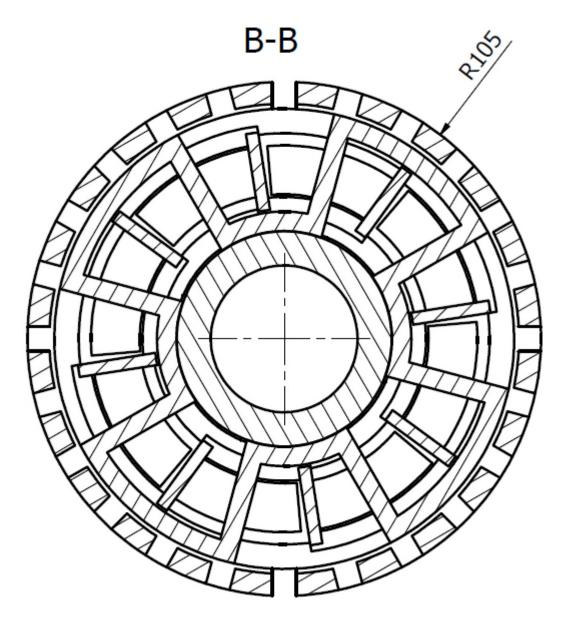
Cross-section B-B, Showing Winding Cross-section and External Diameter
